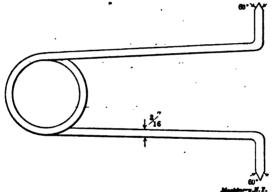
Tool for Cleaning Threads in Chucks and Face-plates
